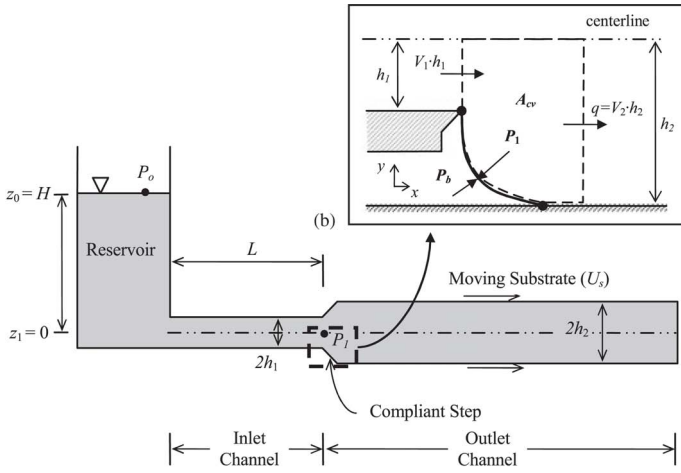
GEOMETRY OF THE STRIP CASTING PROCESS SHOWING THE ALUMINIUM-AIR MENISCUS WHICH FORMS BETWEEN THE CASTING NOZZLE EXIT AND TRANSPORTING CONVEYOR.
